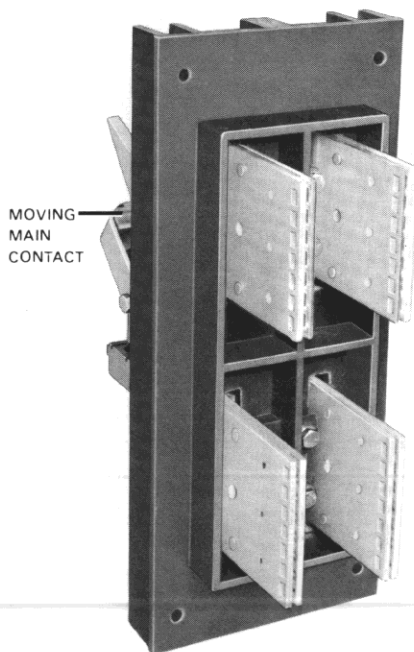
Type DS-840 Pole Unit Assembly—Rear View
